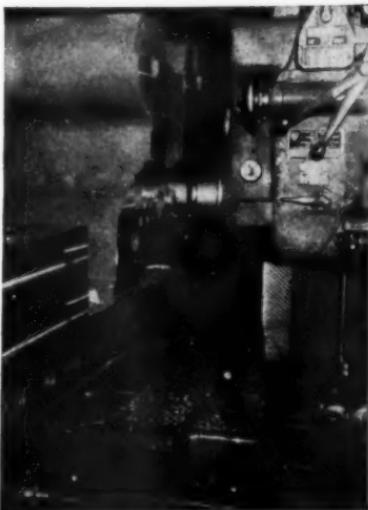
Six-inch face mill taking .400" deep interrupted cut at 33 Ipm or .016" chip load.
